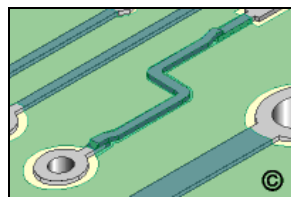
Coat the top and sides of the Circuit Track with Epoxy.
